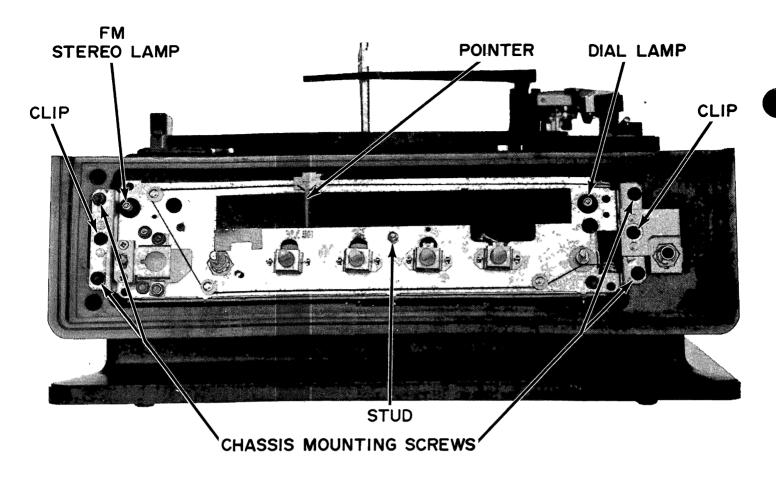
OUT FRONT CHASSIS REMOVAL - GROUP "B"
